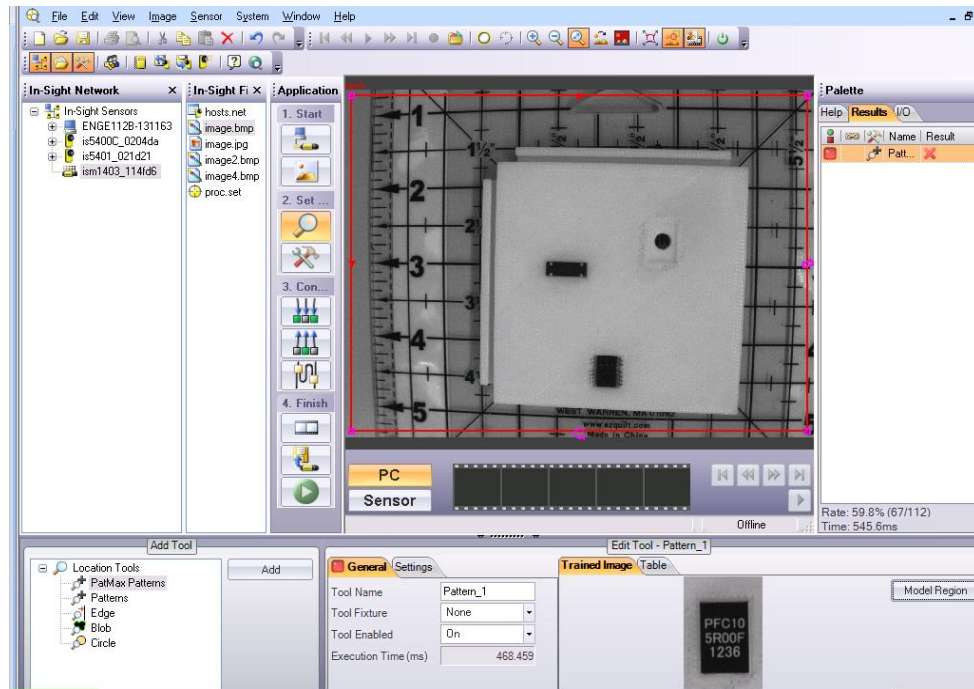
Machine Vision System Defective Platform using PatMax Pattern
